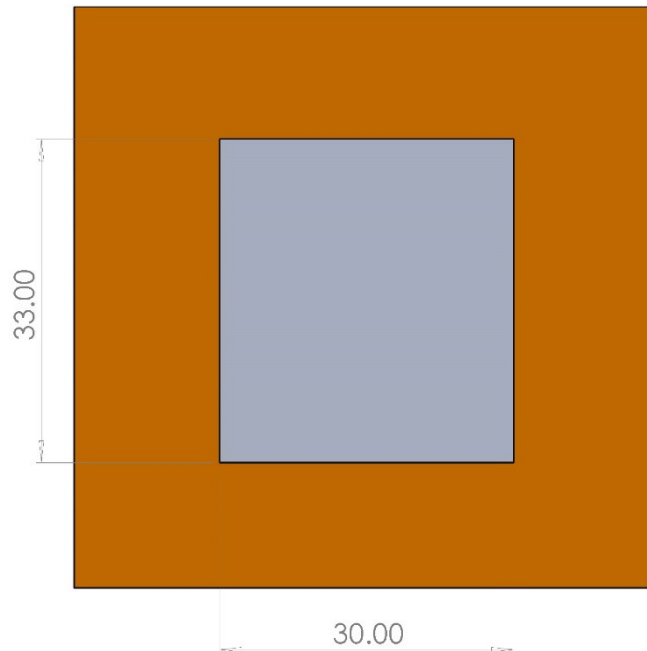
Top view of bottom plate, 30-inch dimension is parallel with the front of the instrument.
